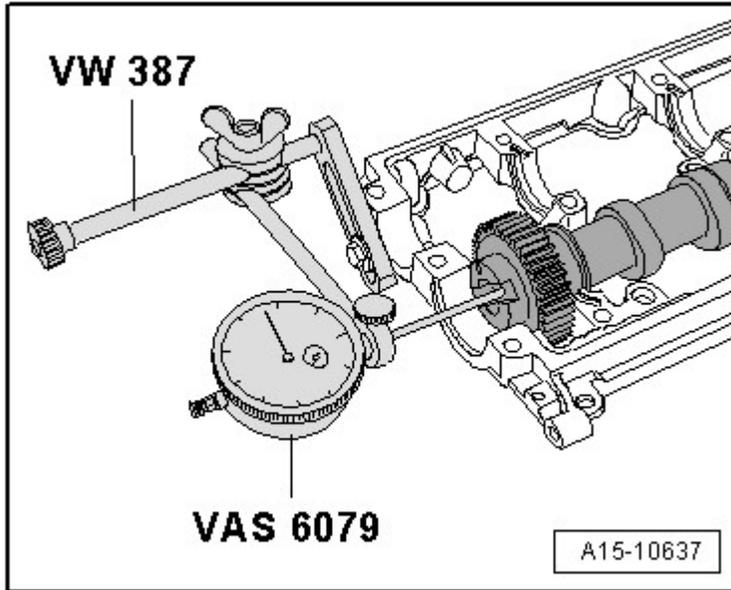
Securing VAS 6079 On Guide Frame With VW 387
